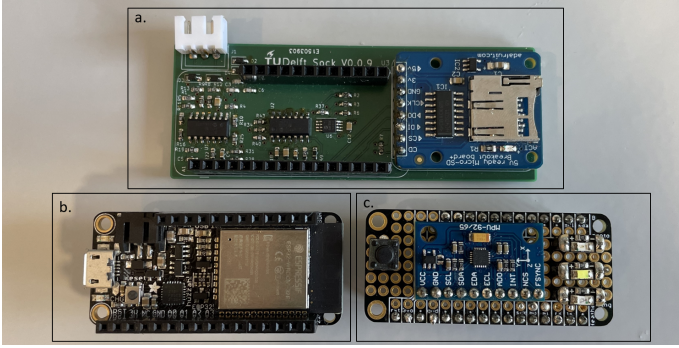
Electronic System Design. (a) Custom four-stage amplification and filtering PCB; (b) ESP32 SoC Featherboard by Adafruit; (c) Auxiliary PCB with LEDs, MPU6500, and button.
